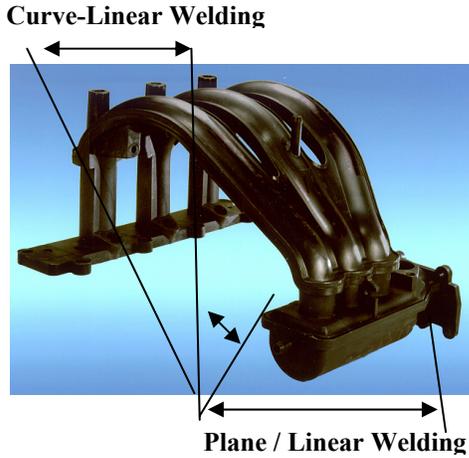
Linear Vibration Welded Plastic Air Intake Manifold (3 pieces)
